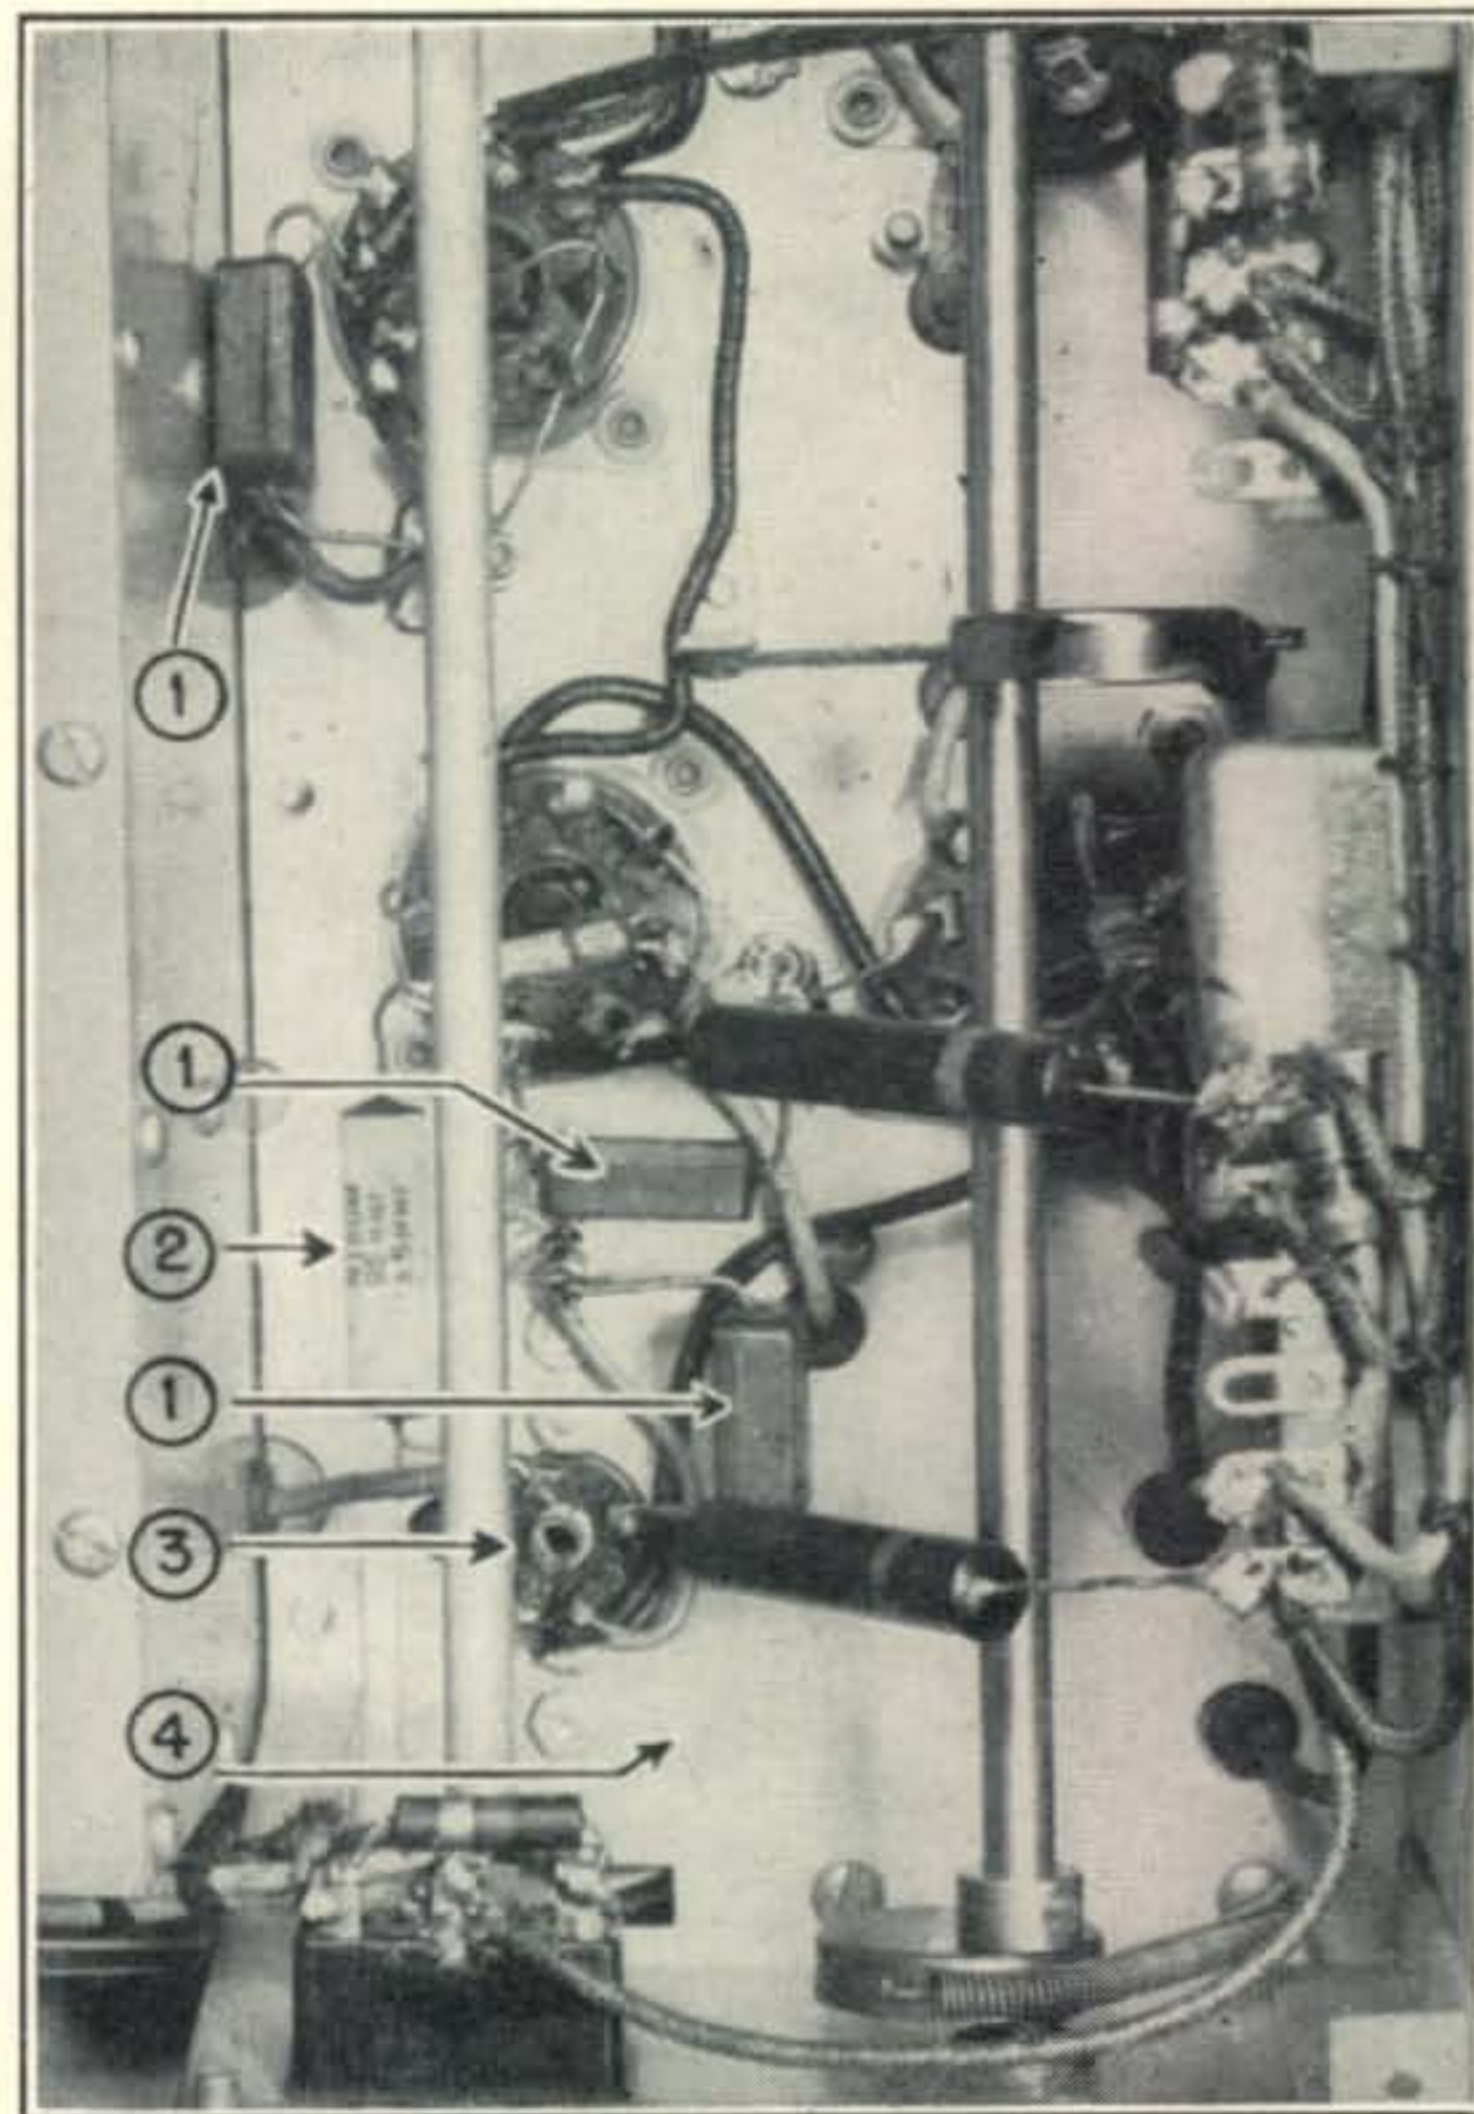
Bottom view, oscillator and mixer area showing modifications completed. (1) .01- μ f molded mica bypass capacitors. (2) 95- μ f "Ceramicon" No. N150M (3) Miniature tube socket. (4) Socket adapter plate.
